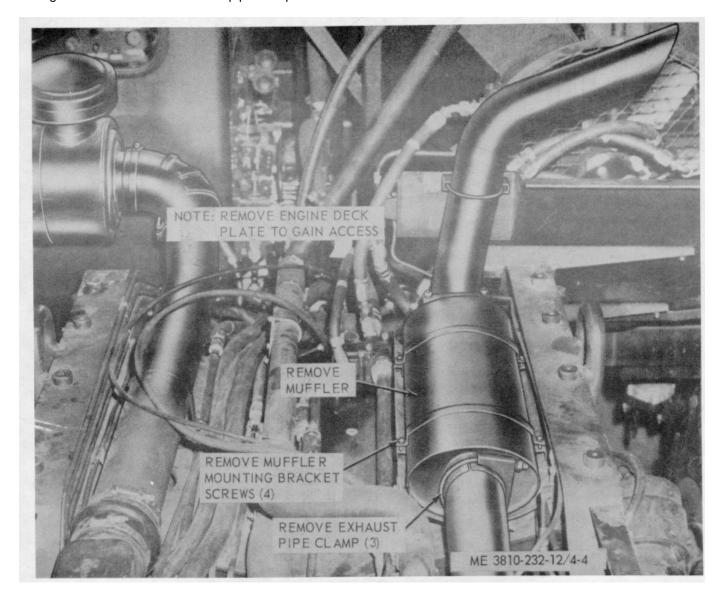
Carrier engine exhaust assembly, removal and installation (Model2385)
